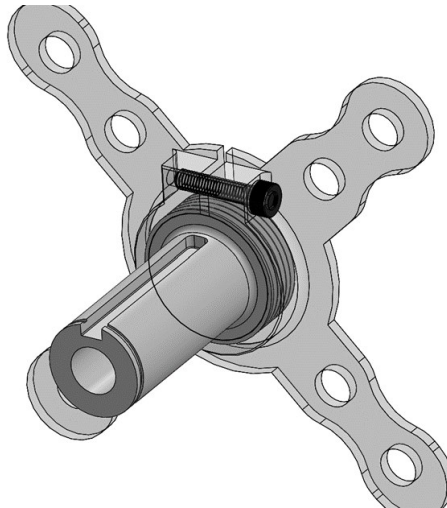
Proximal shaft design with threaded connection and a single keyway
